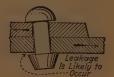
Rivet does not fill hole and is not driven tightly.
